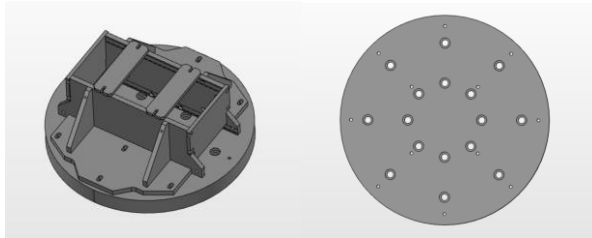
Left: Aluminium adapter rig for vibrational tests without cube, Right: Aluminium base plate for installation of adapter onto shaker plate
